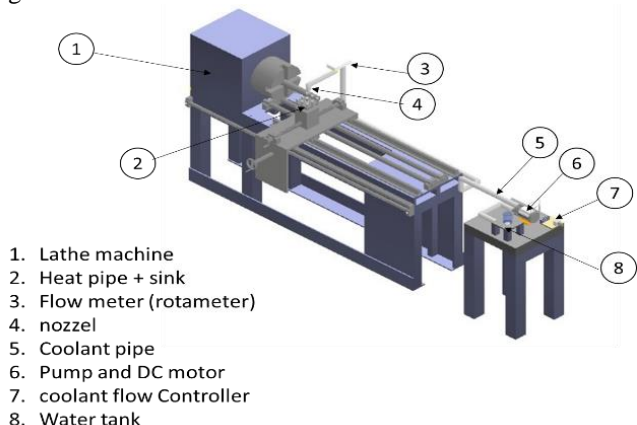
The placement schematic of tool cooling system in the lathe machine
